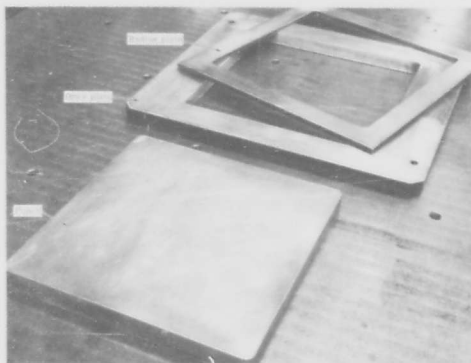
Second Step Flat Heat Shield Panel Marform Dies
